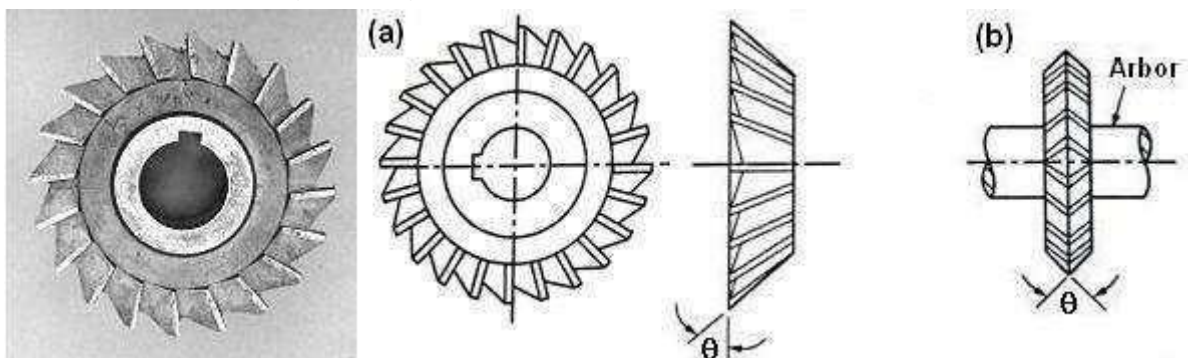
(a) Single angle milling cutter and (b) Double angle milling cutter
